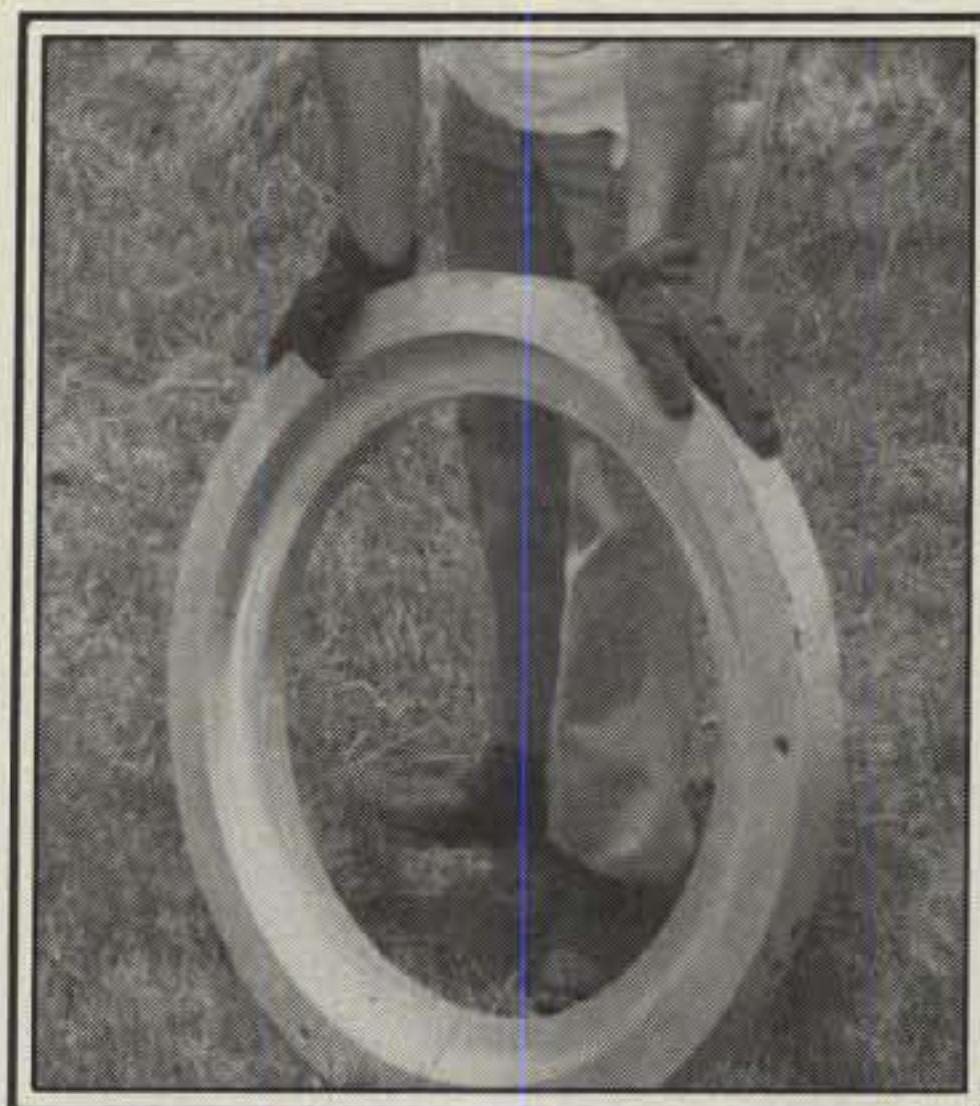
One of four bearing rings. Note the machined cut for the cam followers to ride on and against.
